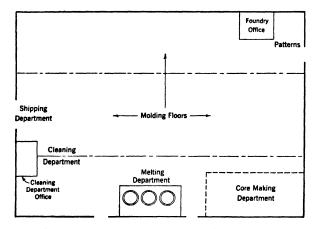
Sketch of Foundry Layout, Showing Principal Departments
